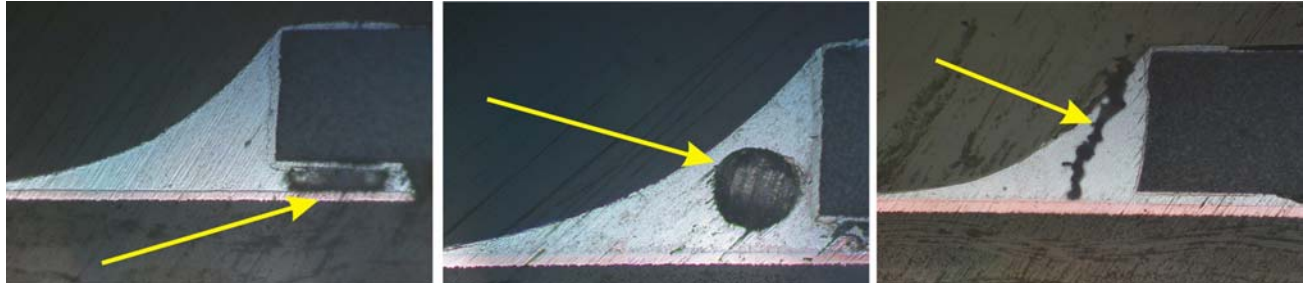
Examples of detected defects of solder joint structures (empty holes and cracks)
